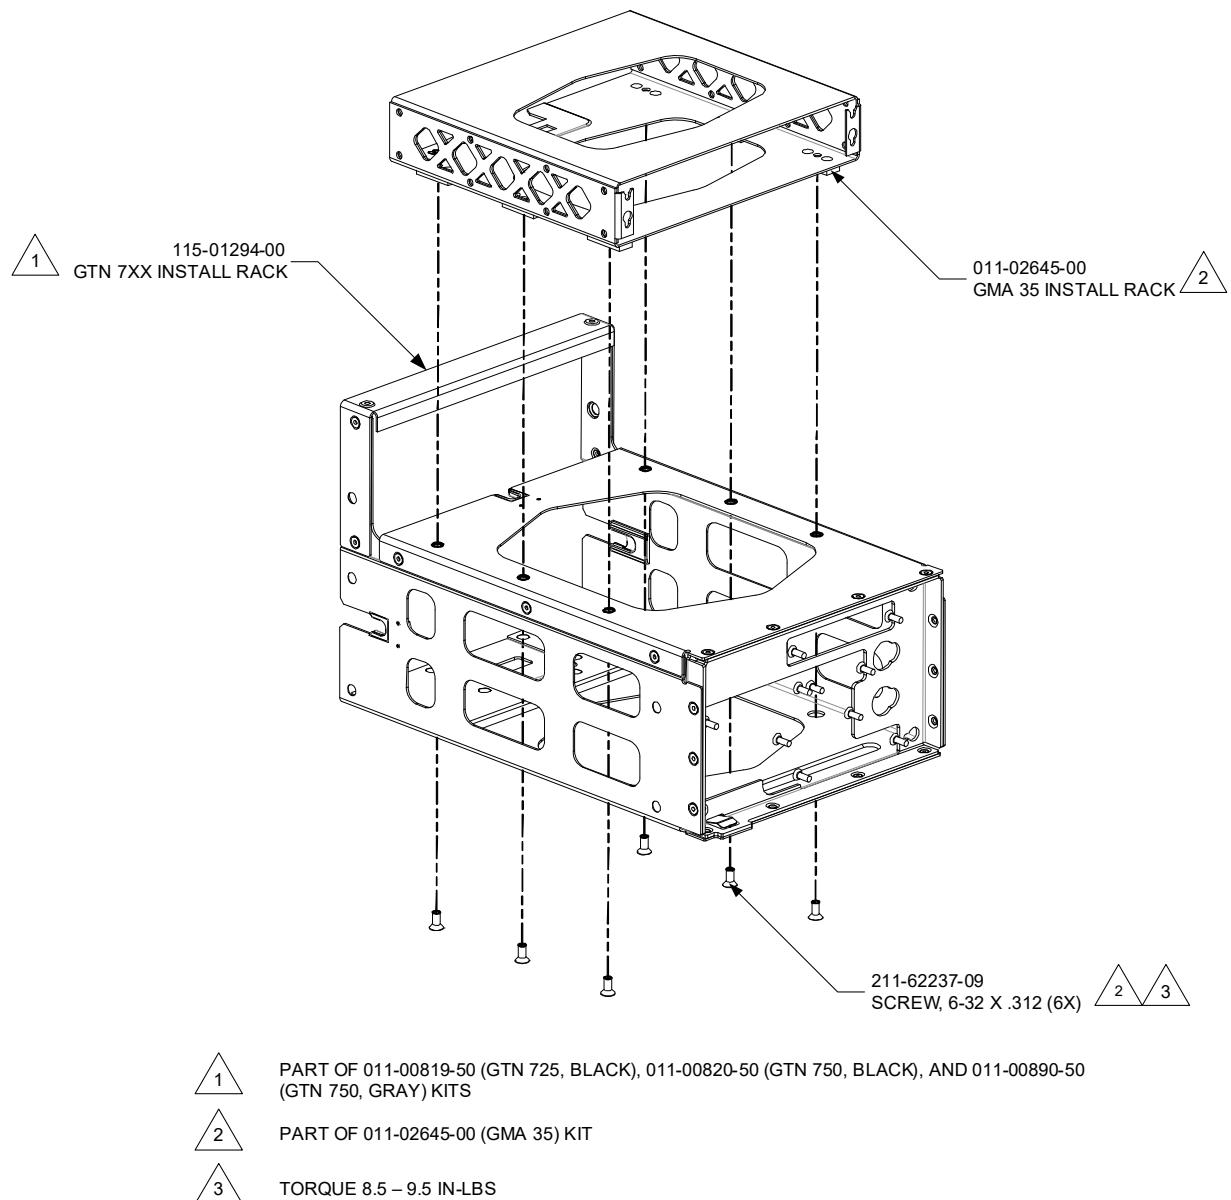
GTN 750Xi with GMA 35 Mounting Rack Assembly
